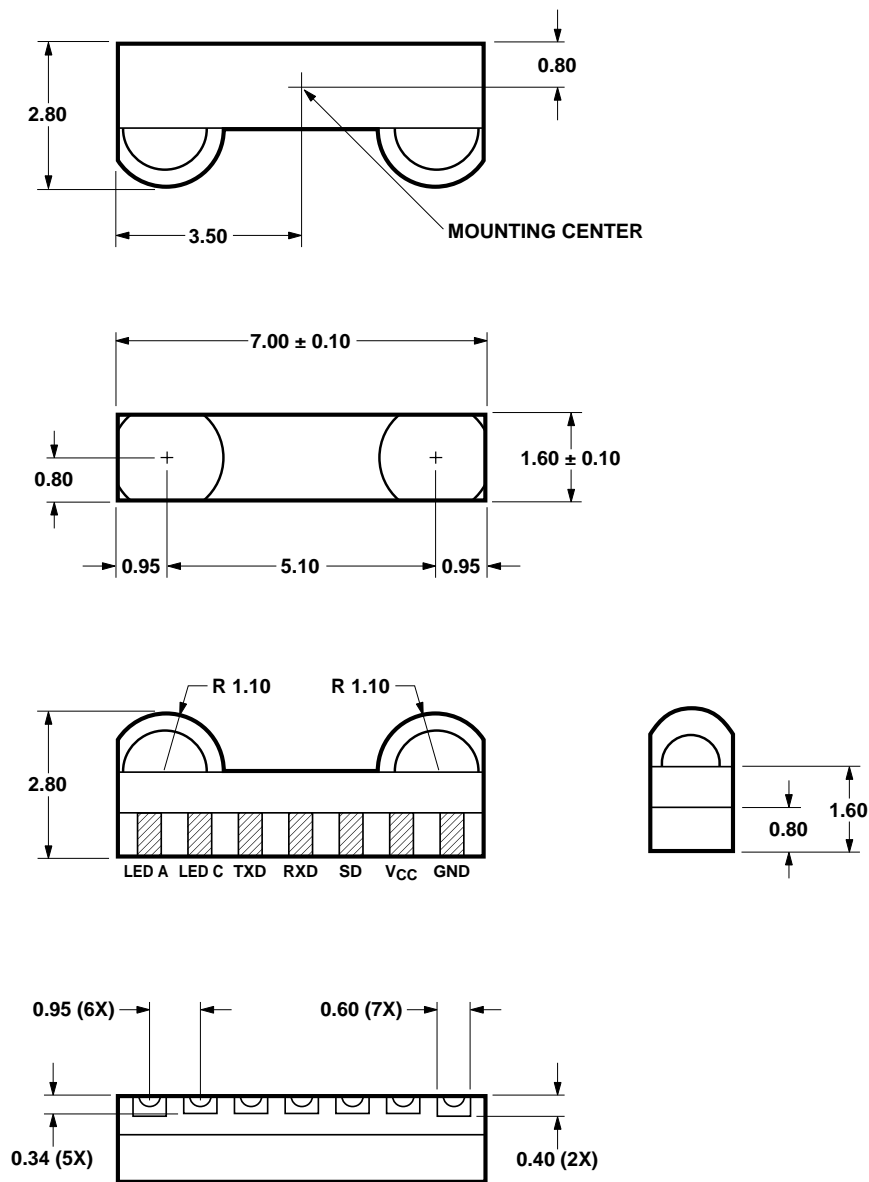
Package outline dimensions. (Unit: mm, Tolerance: ± 0.2 mm)
